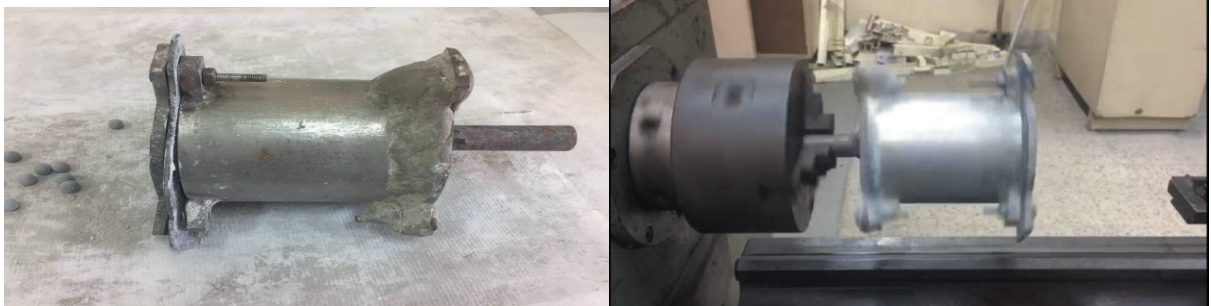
(a) Ball Mill (b) Ball Mill Setup
